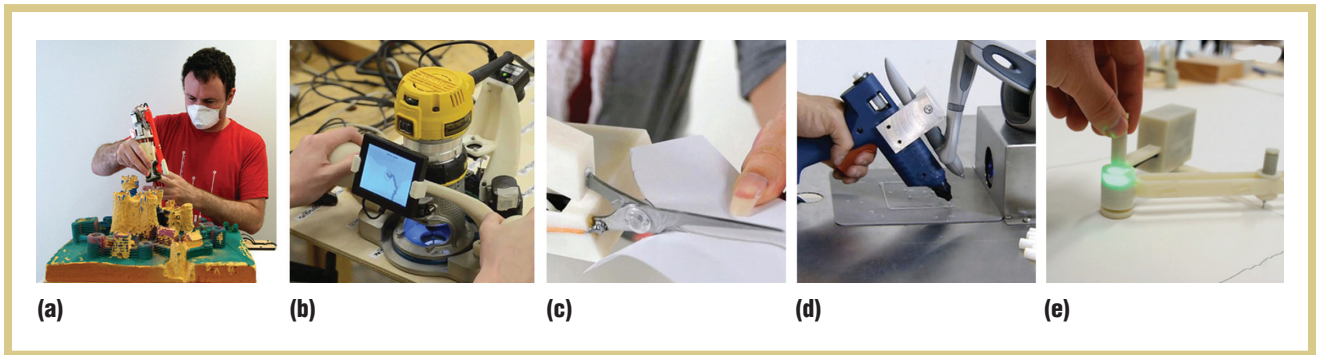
Smart tools for fabrication and printing. Tools enhanced with digital technologies include (a) FreeD, a 3D smart milling device; (b) a position correcting tool, which achieves accurate cuts on large-scale surfaces while letting users freely guide the tool; (c) enhanced scissors, which restrict the user to only cuttable areas on a paper; (d) Haptic Intelligentsia, which uses a haptic interface arm and an extruding gun; and (e) COMP*PASS, a compass-based digital drawing device.
